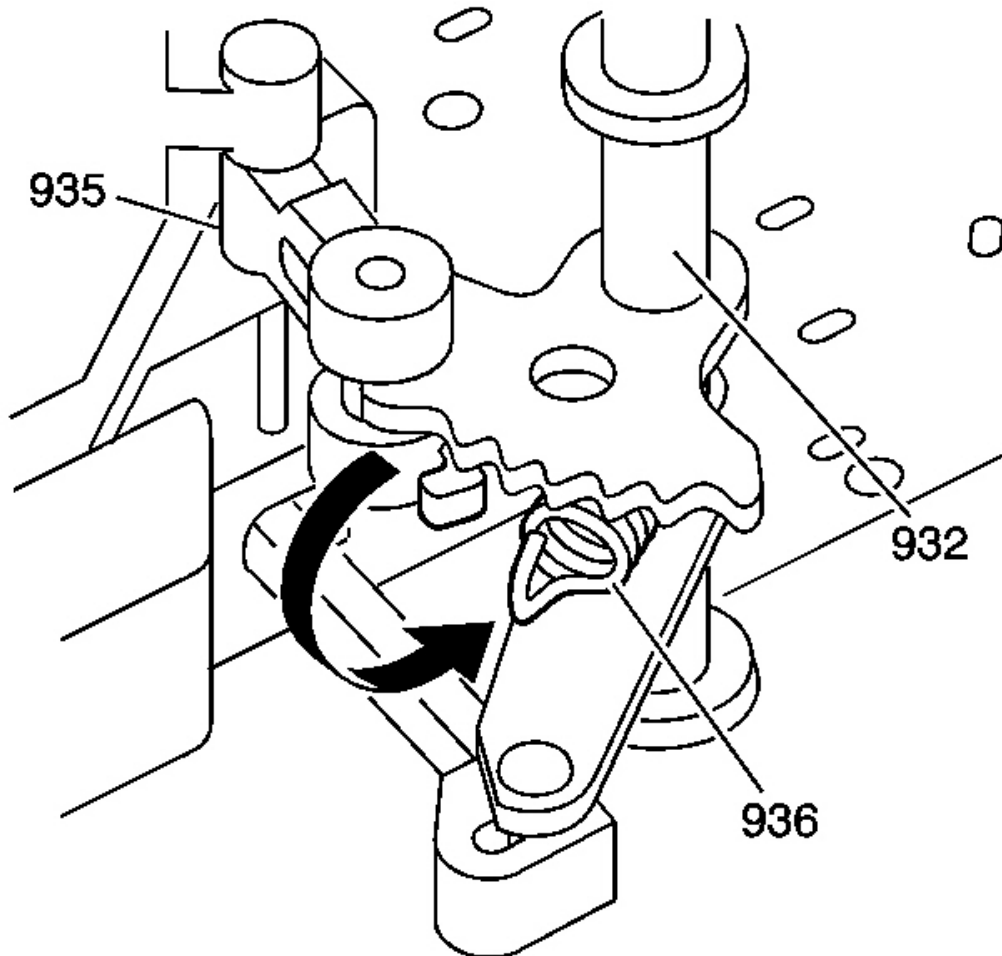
Manual Shift Shaft & Detent Roller Spring
